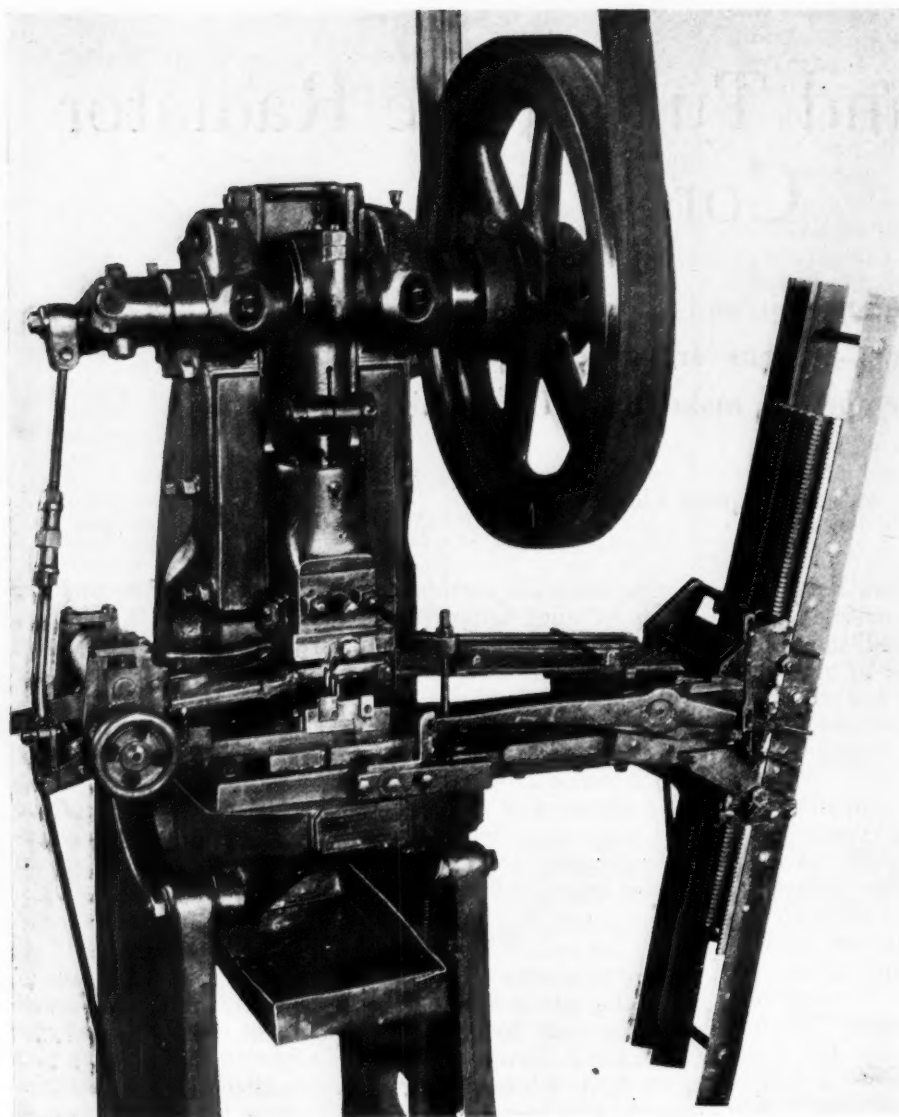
The punch here shown pierces the holes in the fins, cuts the slots in their front edge, cuts the fins off to length and inserts them in the loading jig shown at the right
